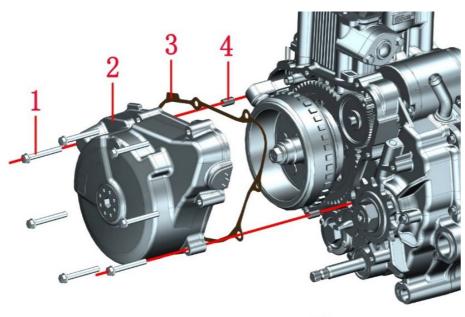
LEFT CRANKCASE		Left crankcase cover assembly-1	CHK
